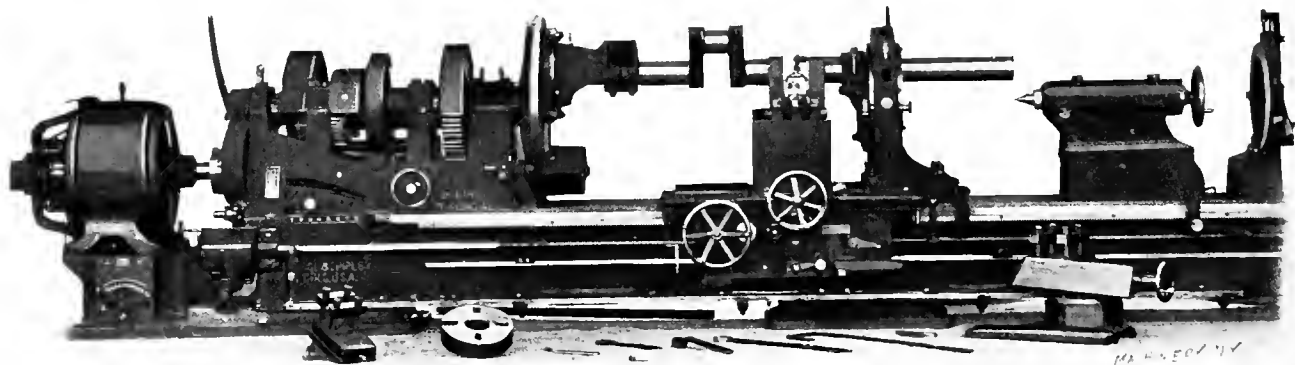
Large Crankshaft Lathe built by the Lodge & Shipley Machine Tool Co.
